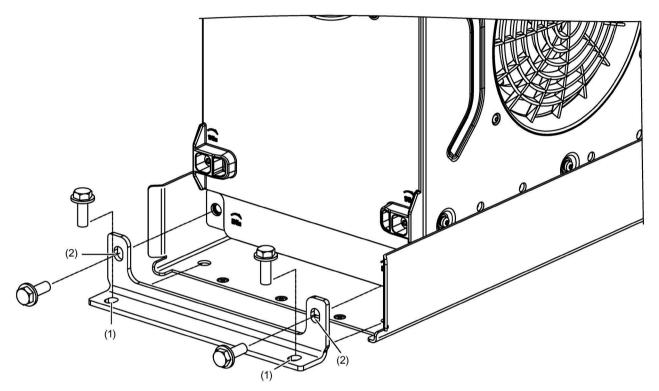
Attaching the mounting bracket (diagram showing an example)
